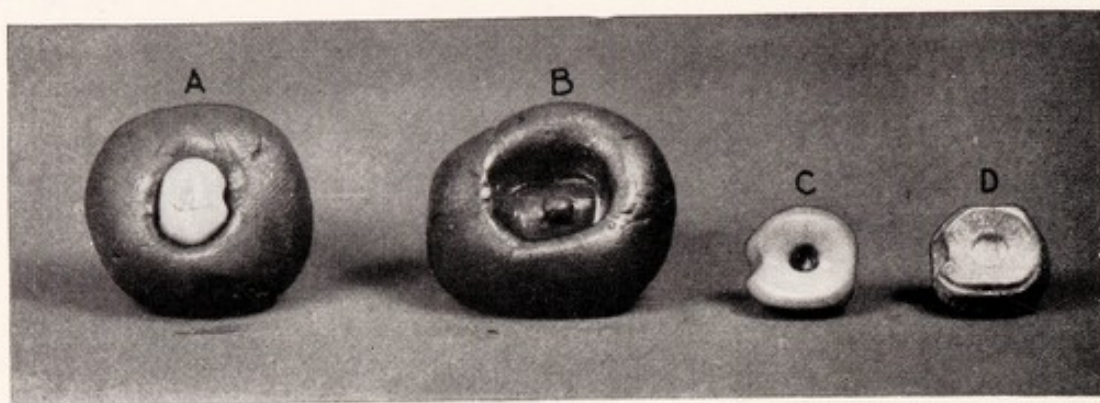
A. Bicuspid porcelain tooth embedded in moldine to give impression of ridge area. B. Moldine impression of molar porcelain tooth. C. Molar porcelain tooth after removal from the impression. D. Metal die secured by pouring fusible metal into B
